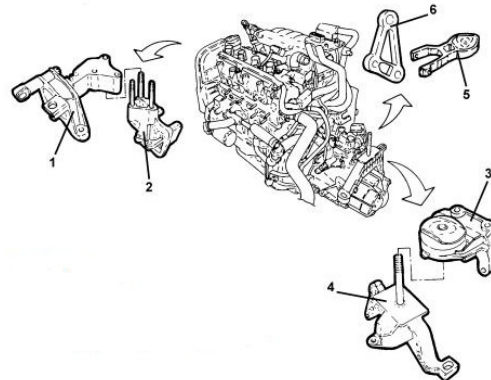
Elements for mounting investigated object (1 - flexible connector on timing gear side, 2 - rigid support on timing gear side, 3 - flexible connector on gearbox side, 4 - rigid support on gearbox side, 5 - reaction rod on differential gear side, 6 - rod fixing support on differential mechanism side) [5]
